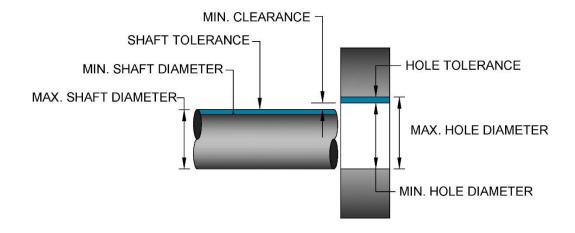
A clearance fit occurs when there is positive clearance between the hole and the shaft.
